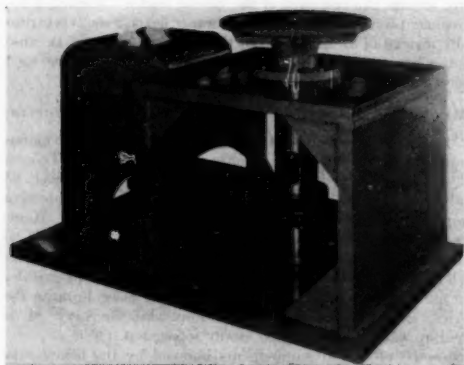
VERTICAL CENTRIFUGAL MACHINE USED FOR BRONZE BEARING CASTINGS
